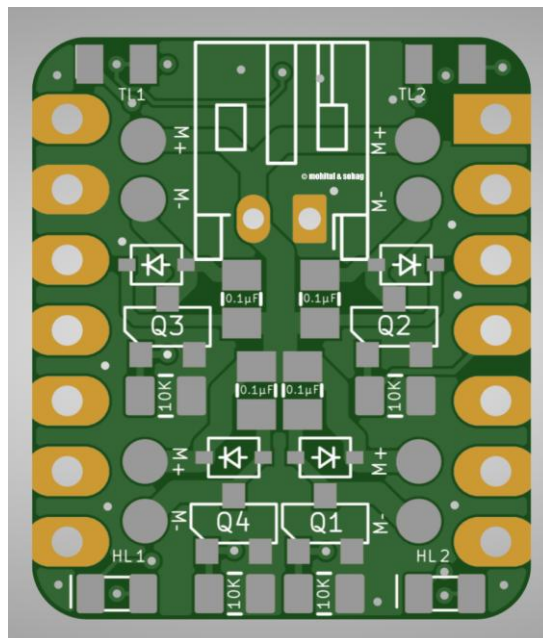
(3D Gerber View of Kokil's PCB) Bottom View
